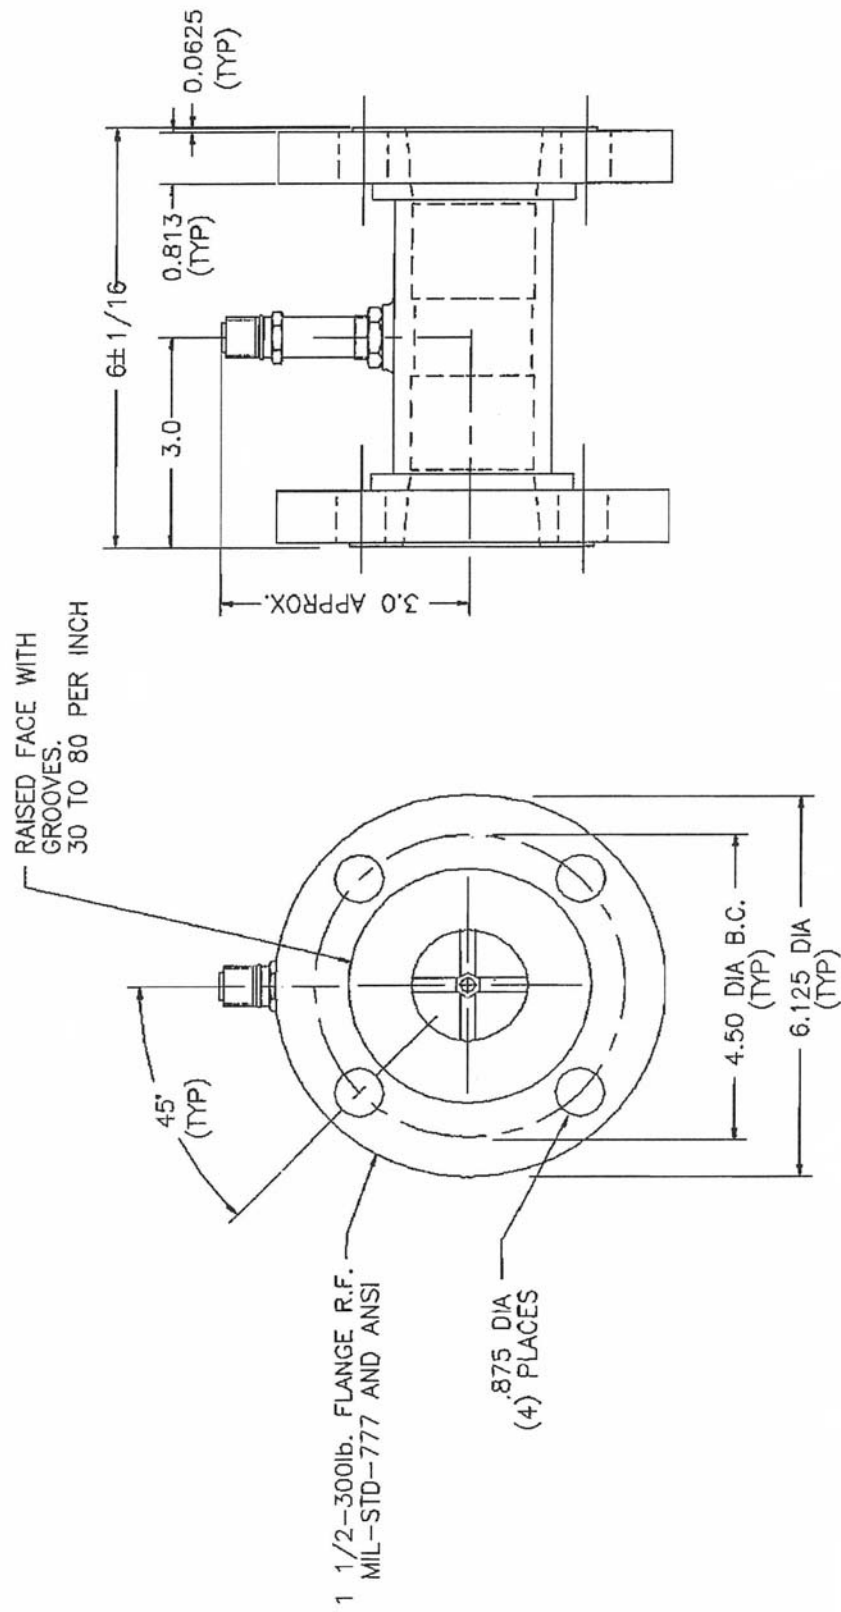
HO 1 1/2-SY100 OUTLINE DIMENSIONS
